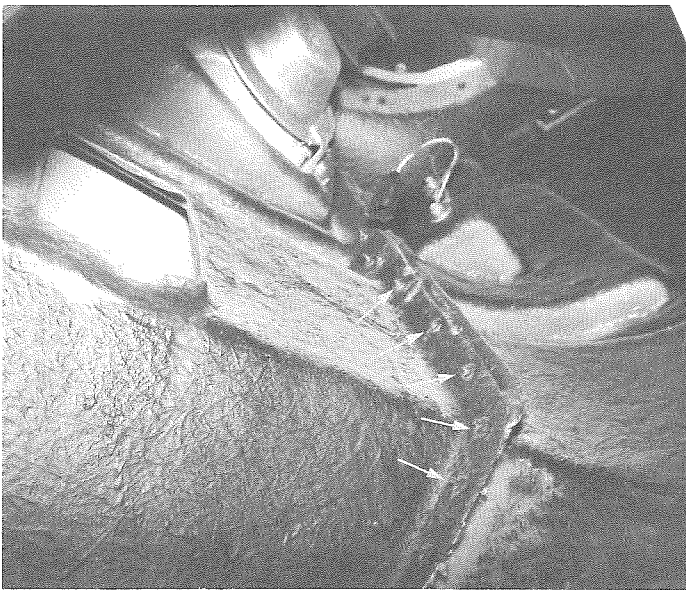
Main Front Body Panel Removal: The body panel is fastened at the two uprights at the upper structure, 6 rivets on the face of the panel. There also are approximately 26 rivets that fasten the panel at the interface of the left and right fenders. Silopreme sealant also is used to secure these body panels together with the aid of the rivets. Care must be taken when separating the body panels so as not to crack the fiberglass. A large flat blade screwdriver or putty knife will be necessary to pry these parts apart. Rivet size and type – AD66 BS pop rivet, .126-.250 grip length, .192-.196 hole diameter. During assembly, 3/16" bolts may be used to fasten the flanges together. Large diameter flat washers should be used with the bolts.
